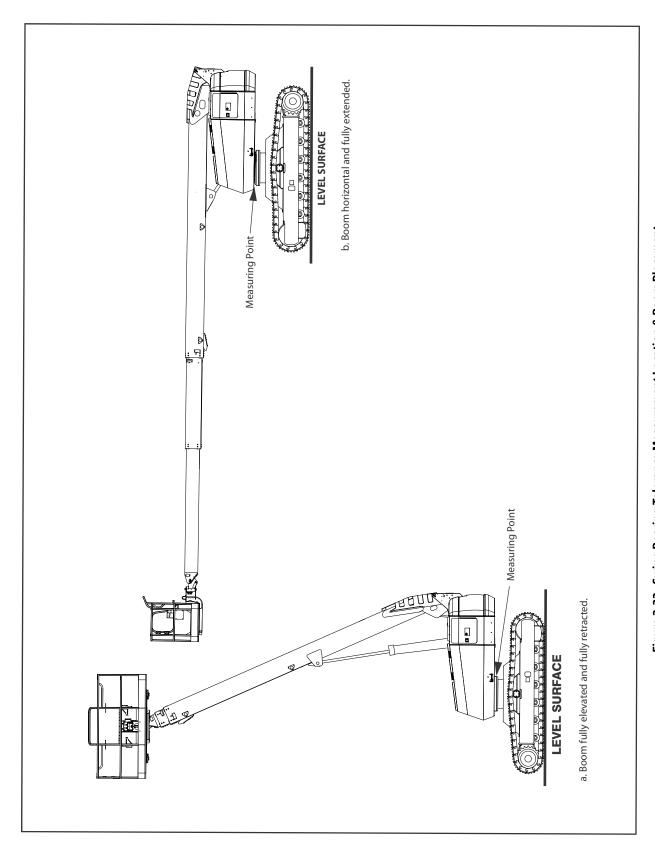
Swing Bearing Tolerance Measurement Location & Boom Placement
